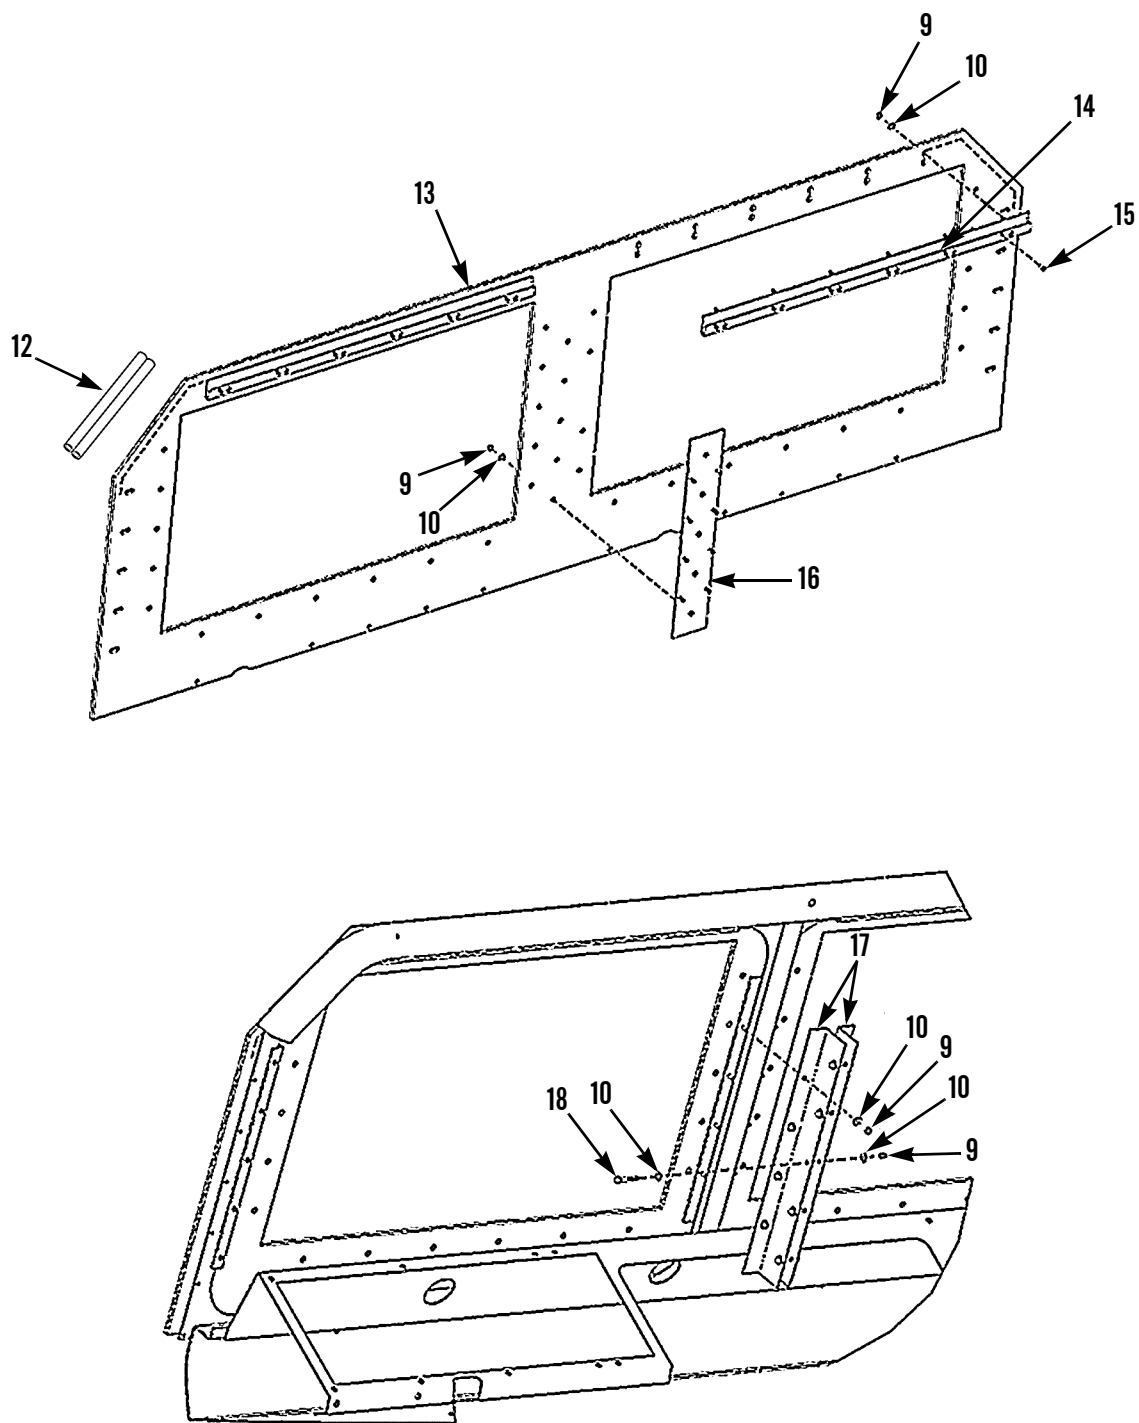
Windshield Armor Kit and Mounting Hardware (Sheet 2 of 2)
